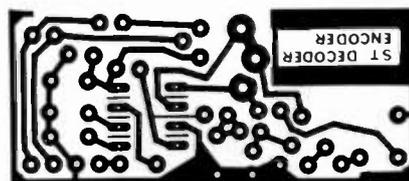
Full-size layout of PCB for the single-tone encoder-decoder.
